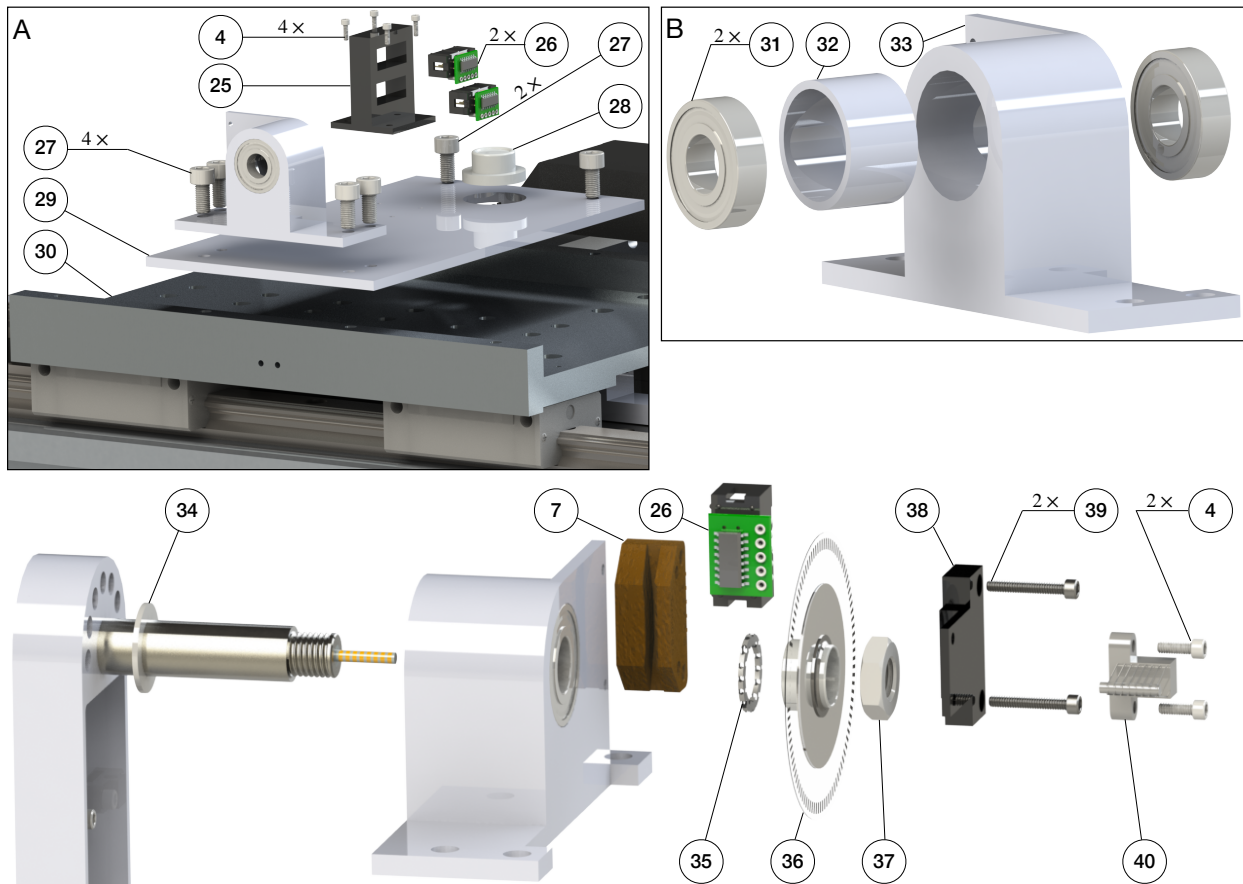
Assembly process of the pendulum cart, pendulum arm and bearing housing. (A) Installation of the bearing housing, cart plate and linear motor stage. (B) Assembly of the ceramic bearing and the bearing housing. (Bottom) Installation of the pendulum arm and bearing housing.
